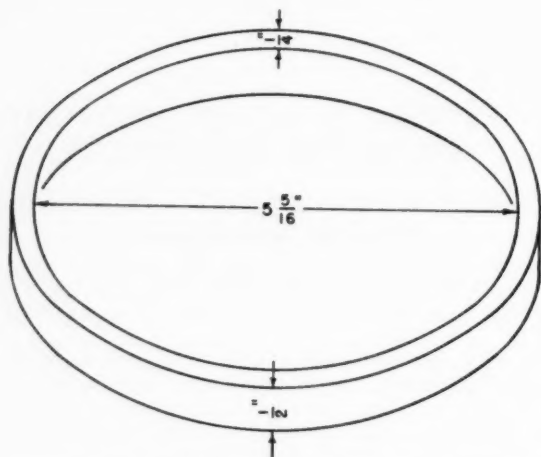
Isometric sketch showing dimensions of molded, circular, belt-type test-specimens used in conjunction with dynamic ozonizer.
